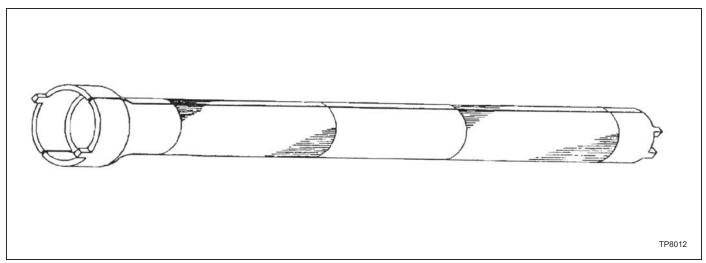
Two-Piece Backlash Adjustment Tool
